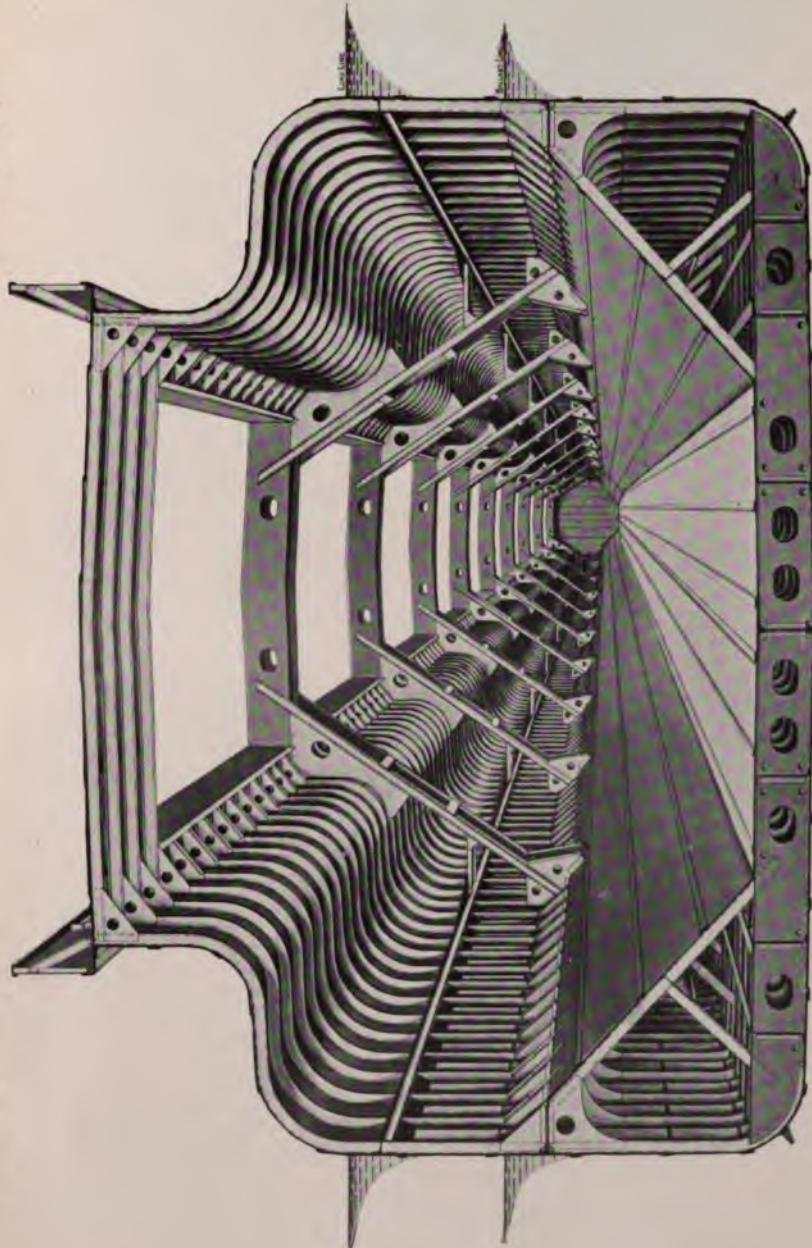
Hold View of special Self-trimming Type of Turret Steamer for Coal, Ore, and Timber Trades.
